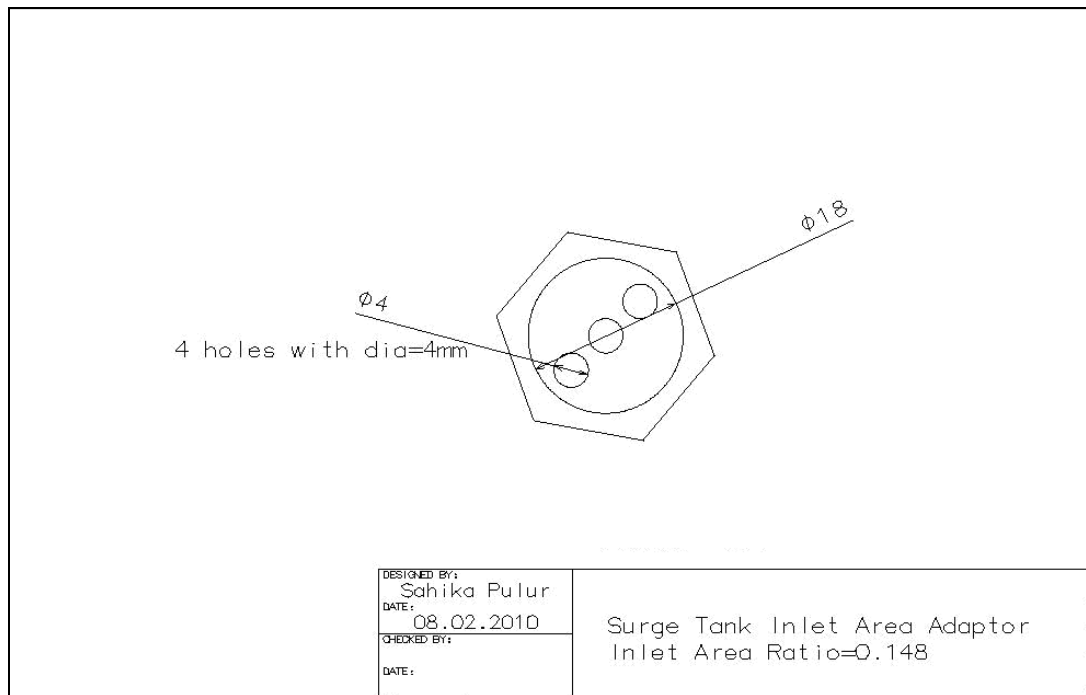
Technical Drawing of Adaptor with $r=0.15$
